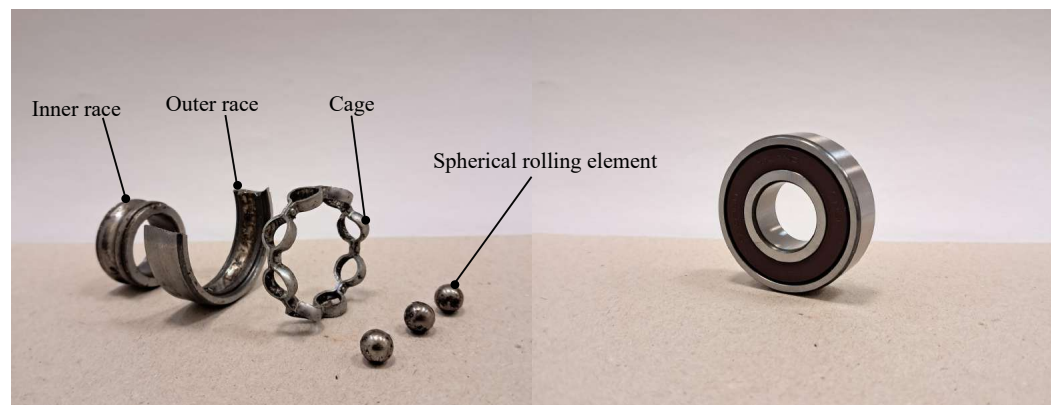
Real bearing disassembly including its different constructional elements and a fully assembled version.
